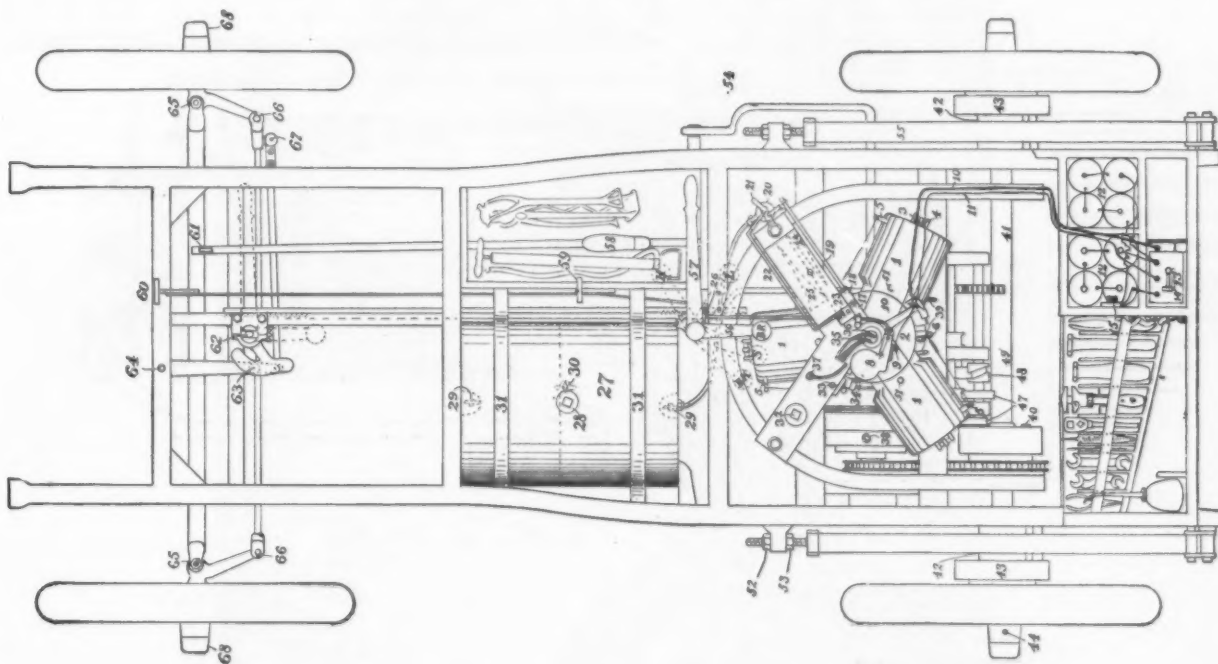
View of the Chassis of an Adams-Farwell Motor Car, Showing the Arrangement of the Machinery.
